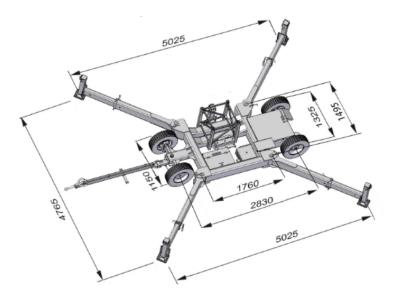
SC5000 on wheel chassis, main components.
